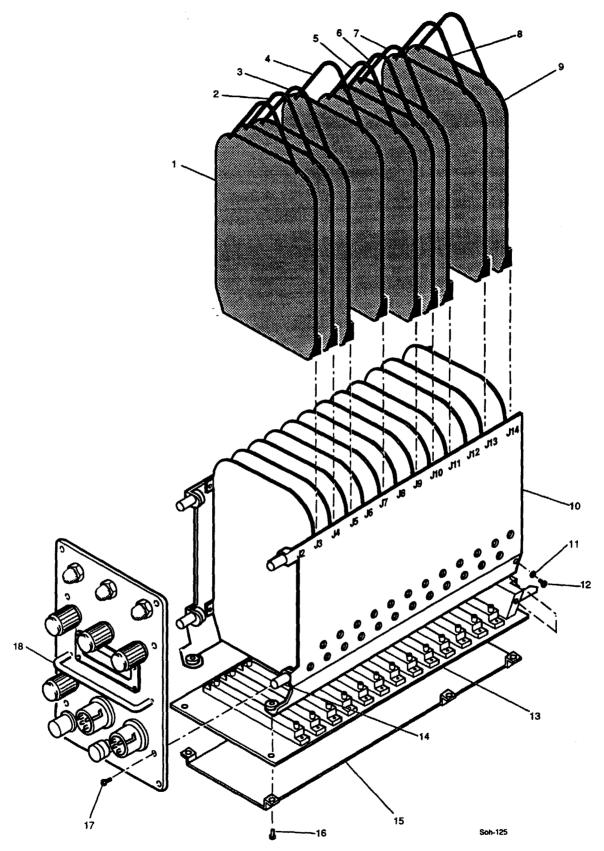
Disassembly of Radio Chassis Assembly
